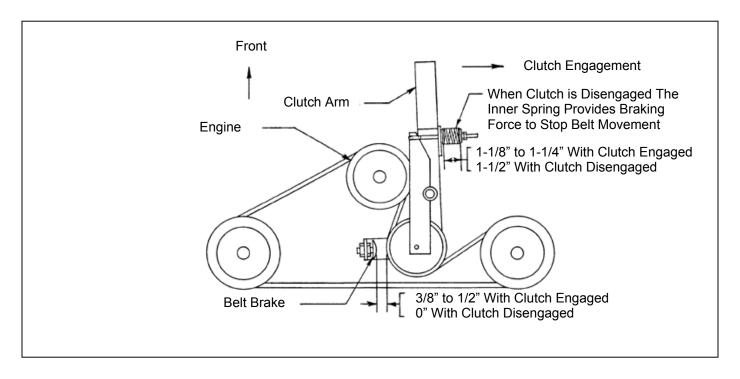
Belt Pattern and Spring Adjustment (Model H40B)
